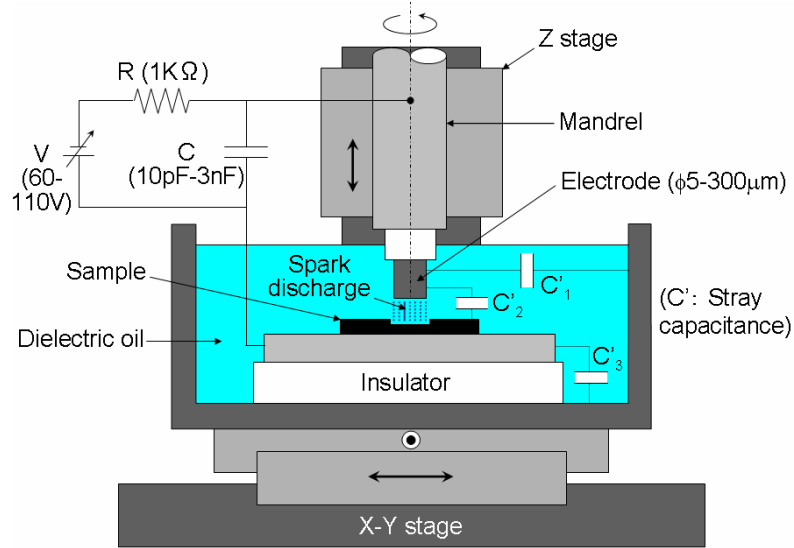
Basic configuration of a μ EDM machine [Tak05].
